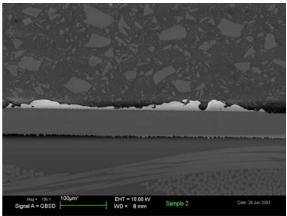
SEM Image of a X-Section (195x mag.) of a SMD BGA Pad after Ball Shear Testing on an 8.0% P Nickel layer - Fracture within the Solder, nearby the Ni/Sn IMC
